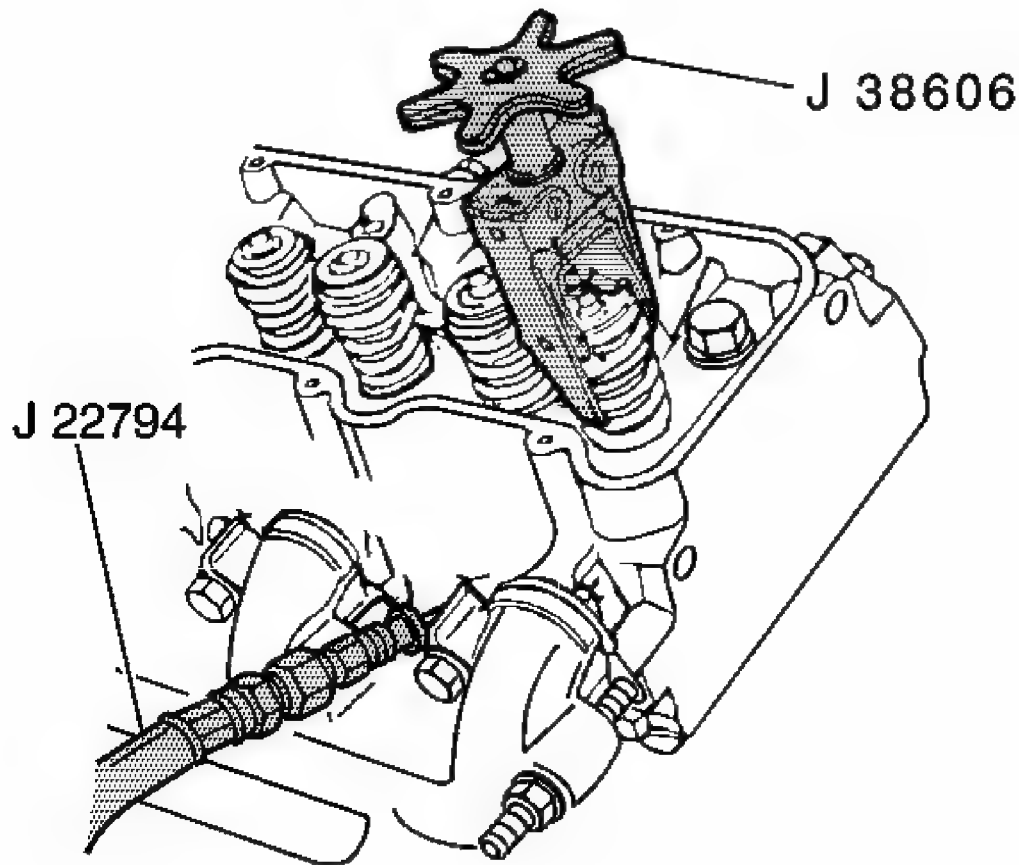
Compress The Valve Spring (Cylinder Head Installed) Using Special Tools
